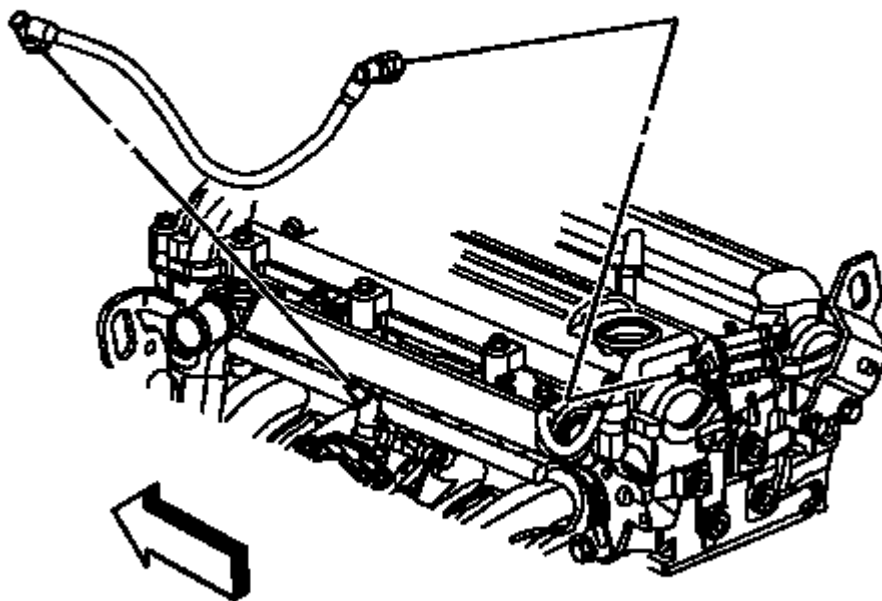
Identifying EVAP Canister Purge Solenoid Valve Tube
